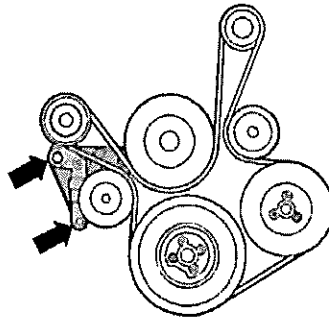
Ribbed V-belt (FEAD) - removing tensioning element
